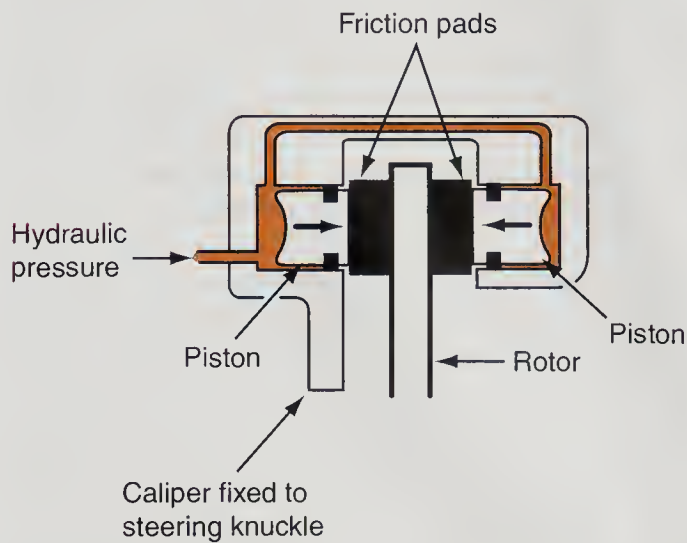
Hydraulic pressure is applied equally to pistons on both sides of a fixed caliper.
